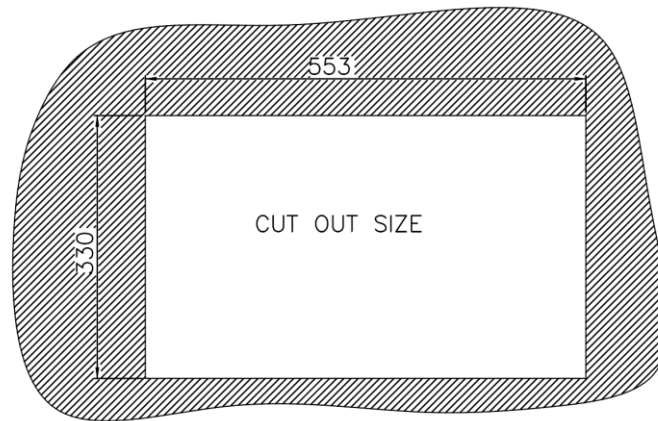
DM2-238K(L) Cutout Dimensions (Unit: mm)
